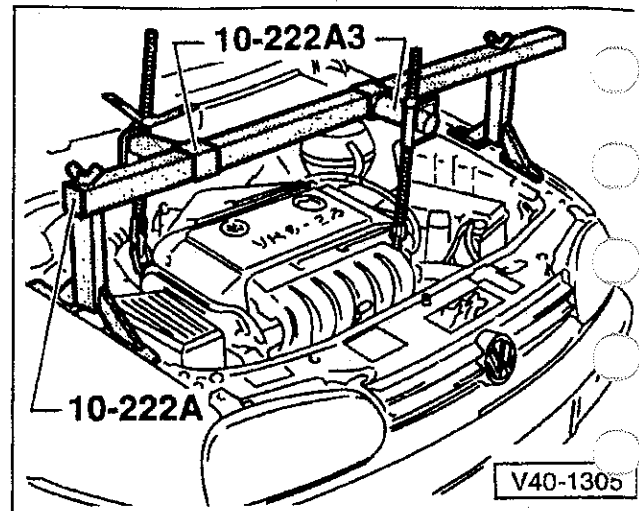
Engine lifting equipment used to support weight of engine/transmission. Numbers shown are for VW special tools.
